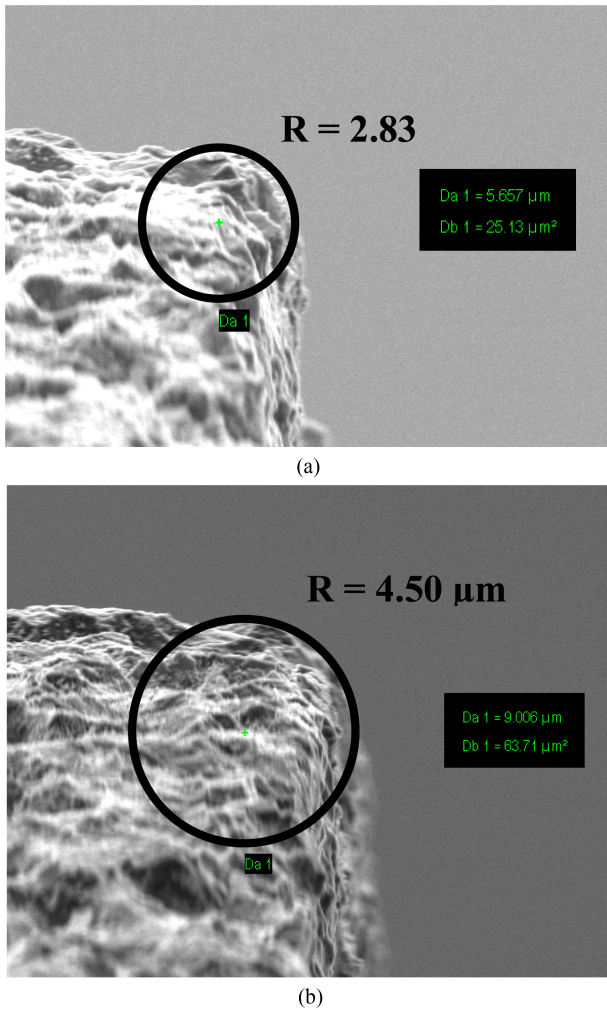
Edge radius of disk tool (a) before machining and (b) after machining
